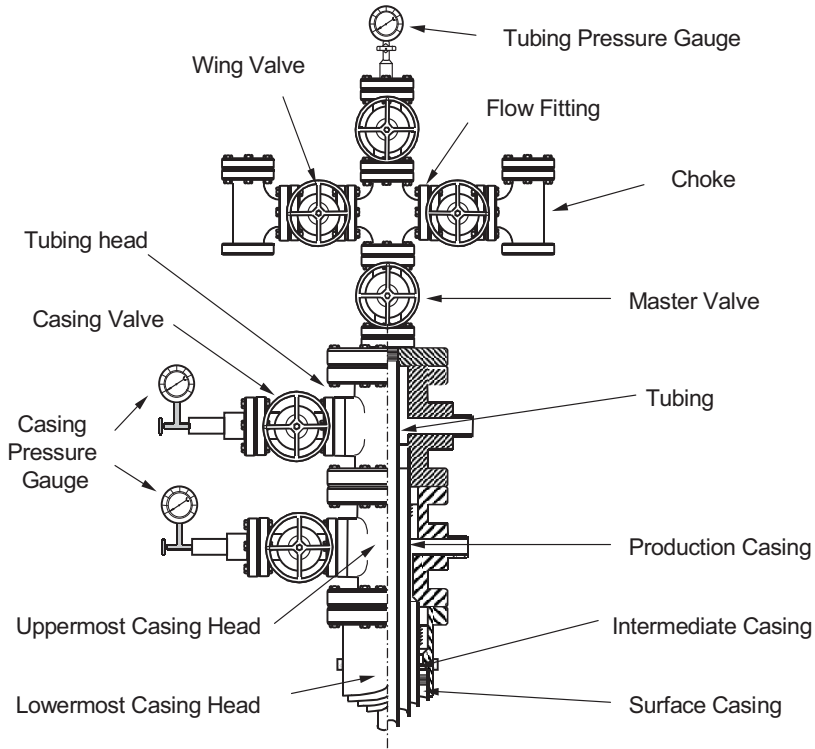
The wellhead is the link between casing and tubing within the wellbore and the surface production equipment.
